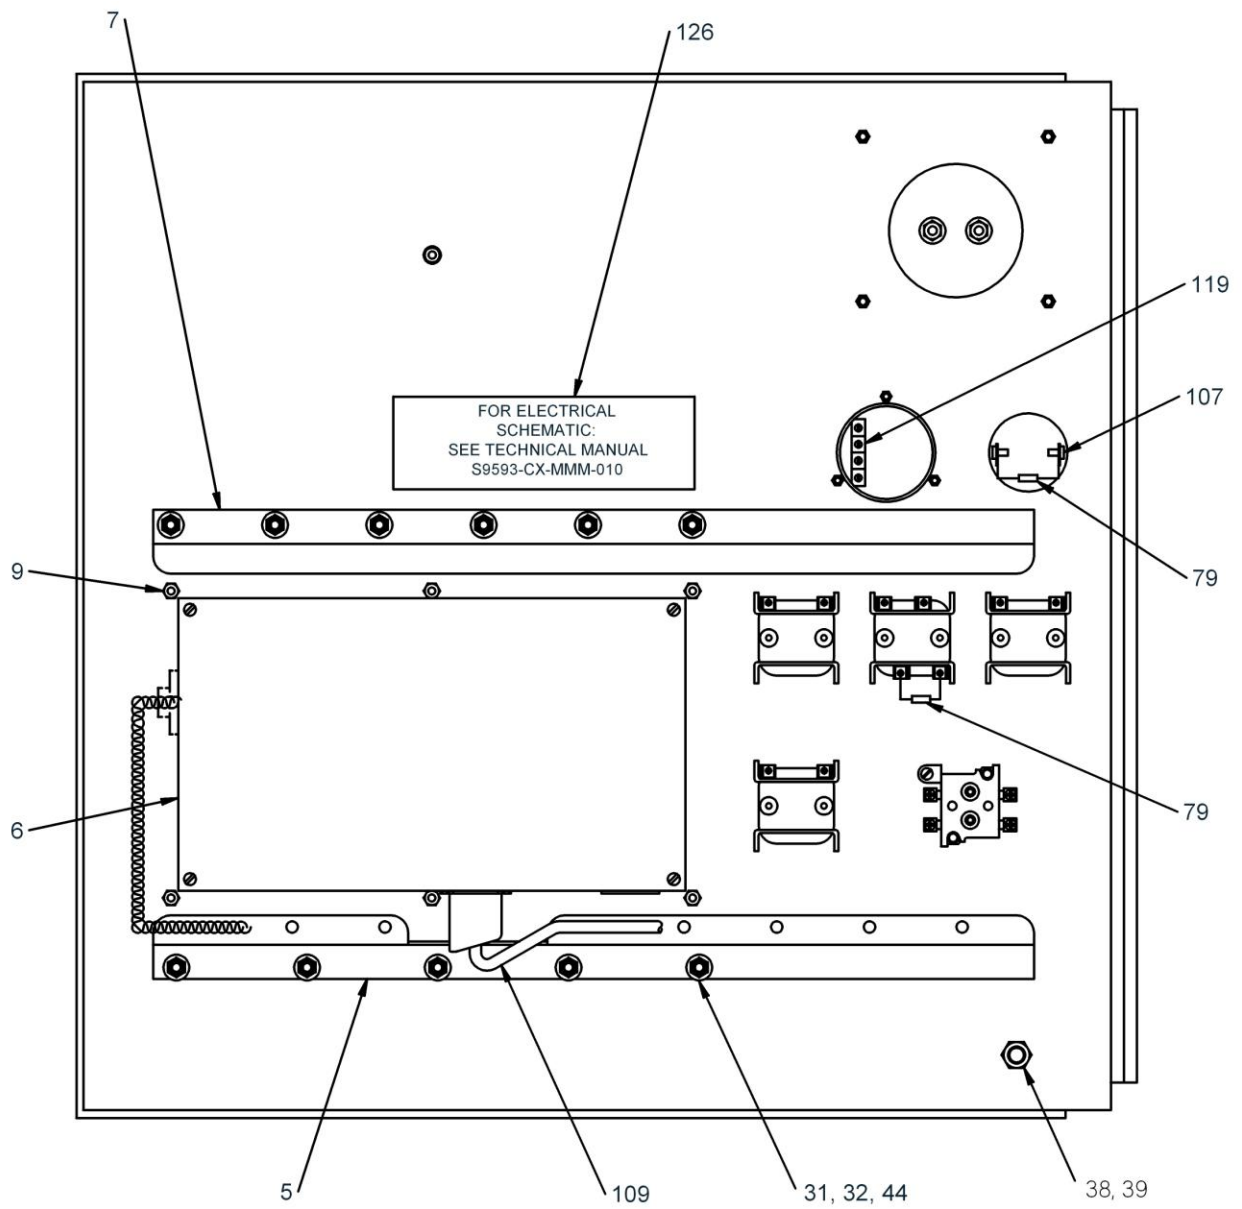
(SHEET 3) – REAR OF ELECTRICAL CONTROL ENCLOSURE DOOR
